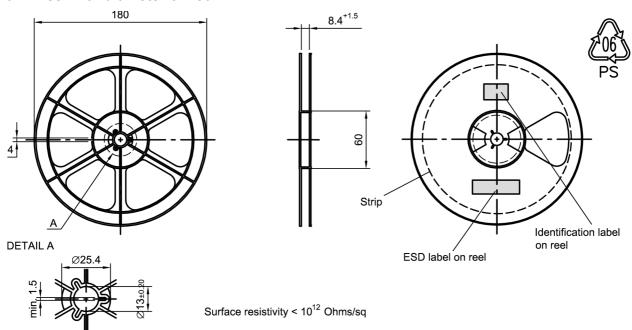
Drawing of reel (first-angle projection) with diameter of 180 mm.
